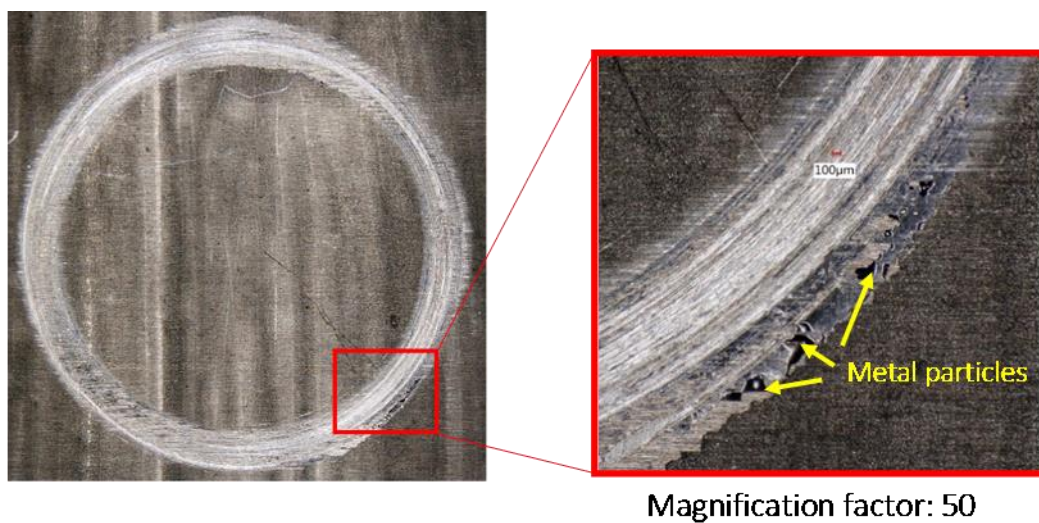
Visual inspection of the AA70XX T76 sheet specimen after testing with OKS at 200°C
